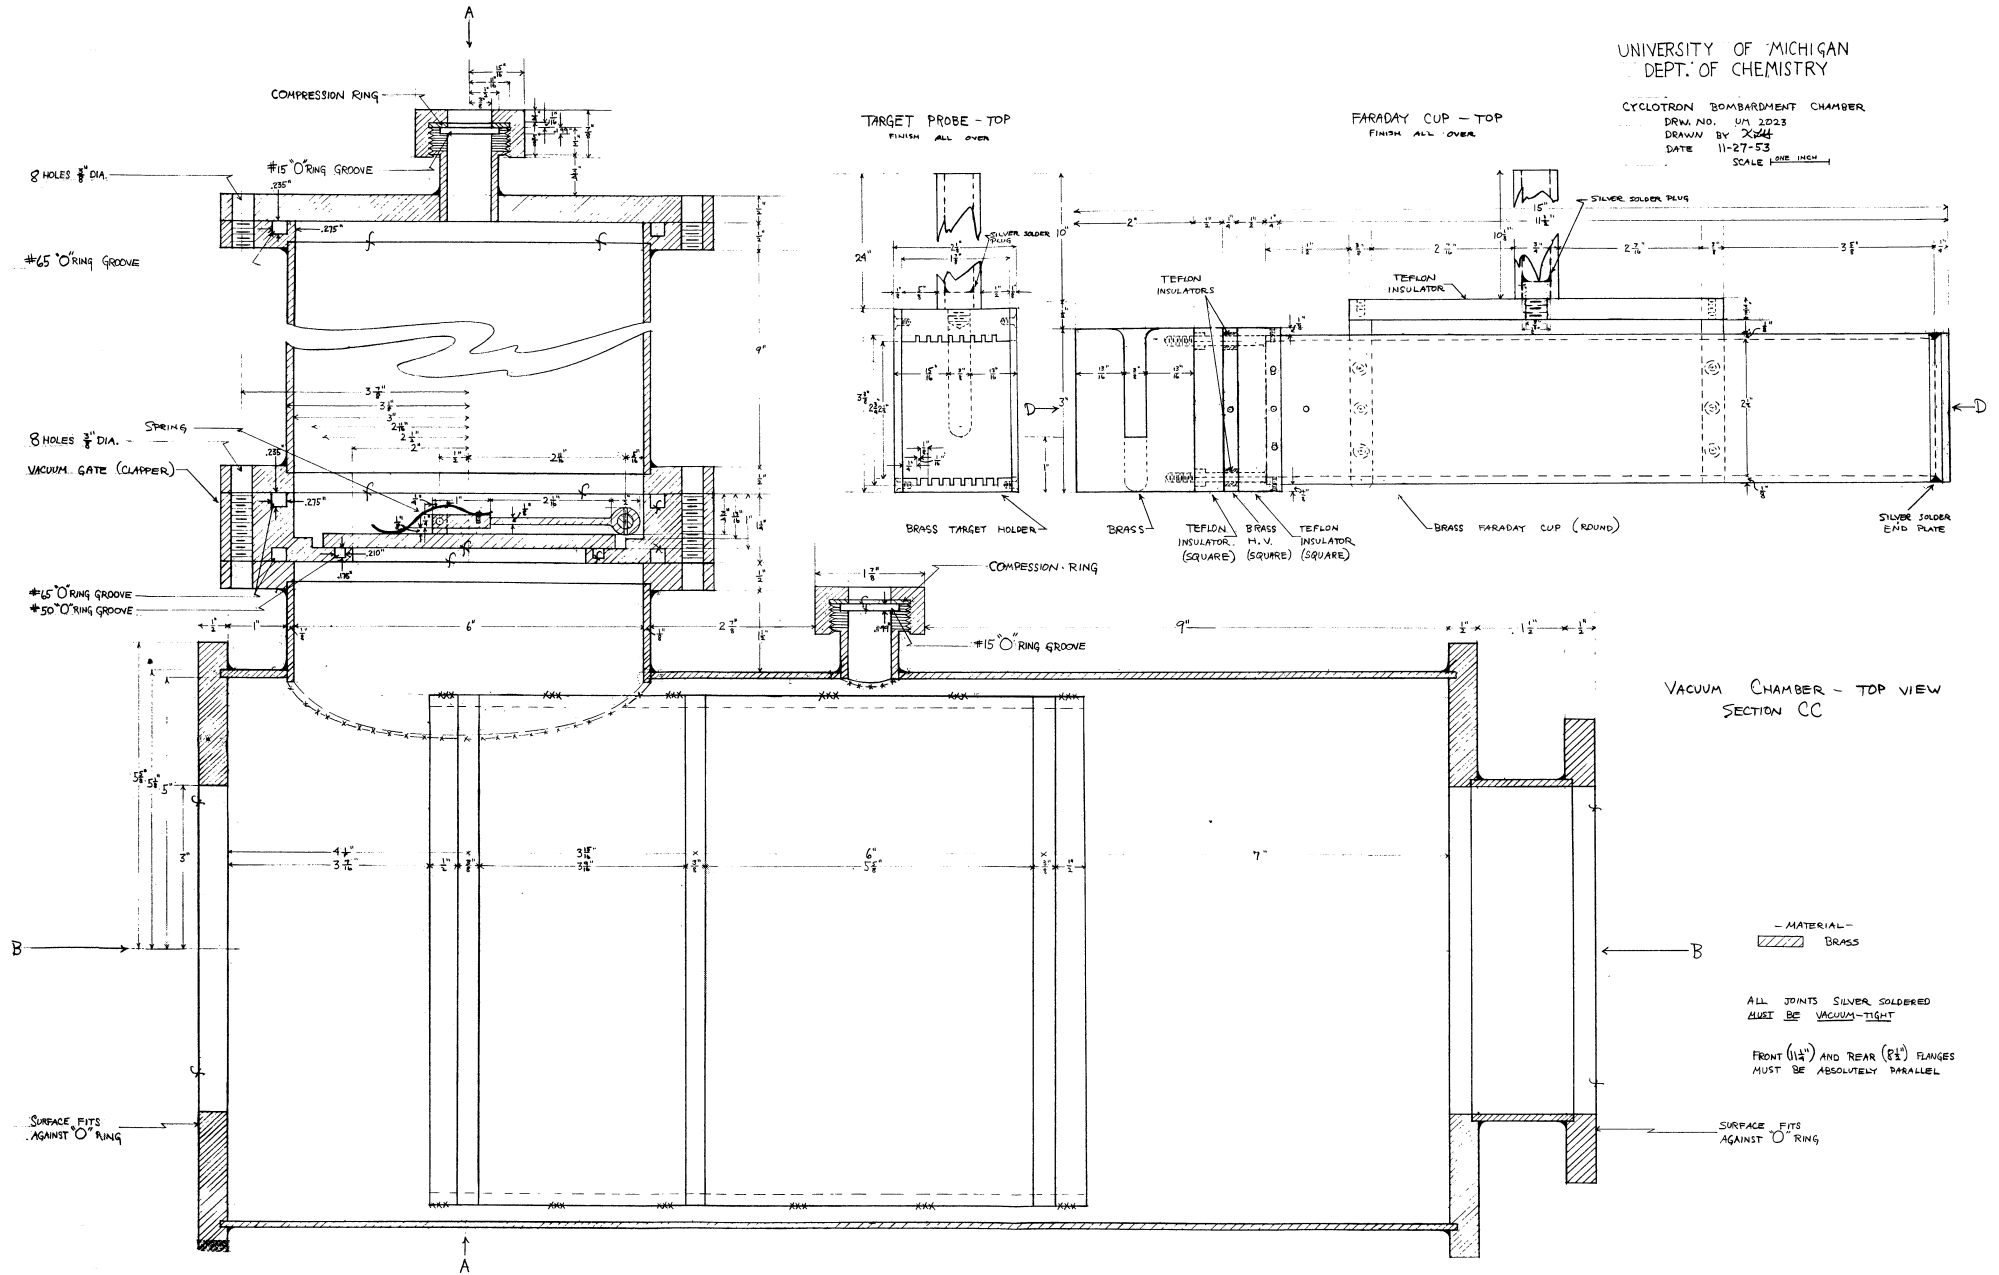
Machine drawing of the cyclotron bombardment chamber - top view.
